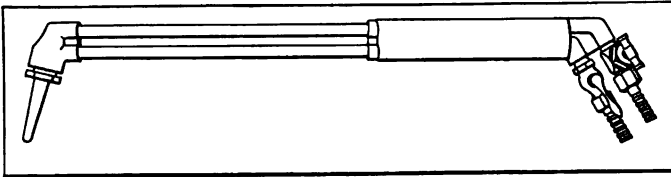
Oxy-acetylene Torch for Medium and Heavy Welding
